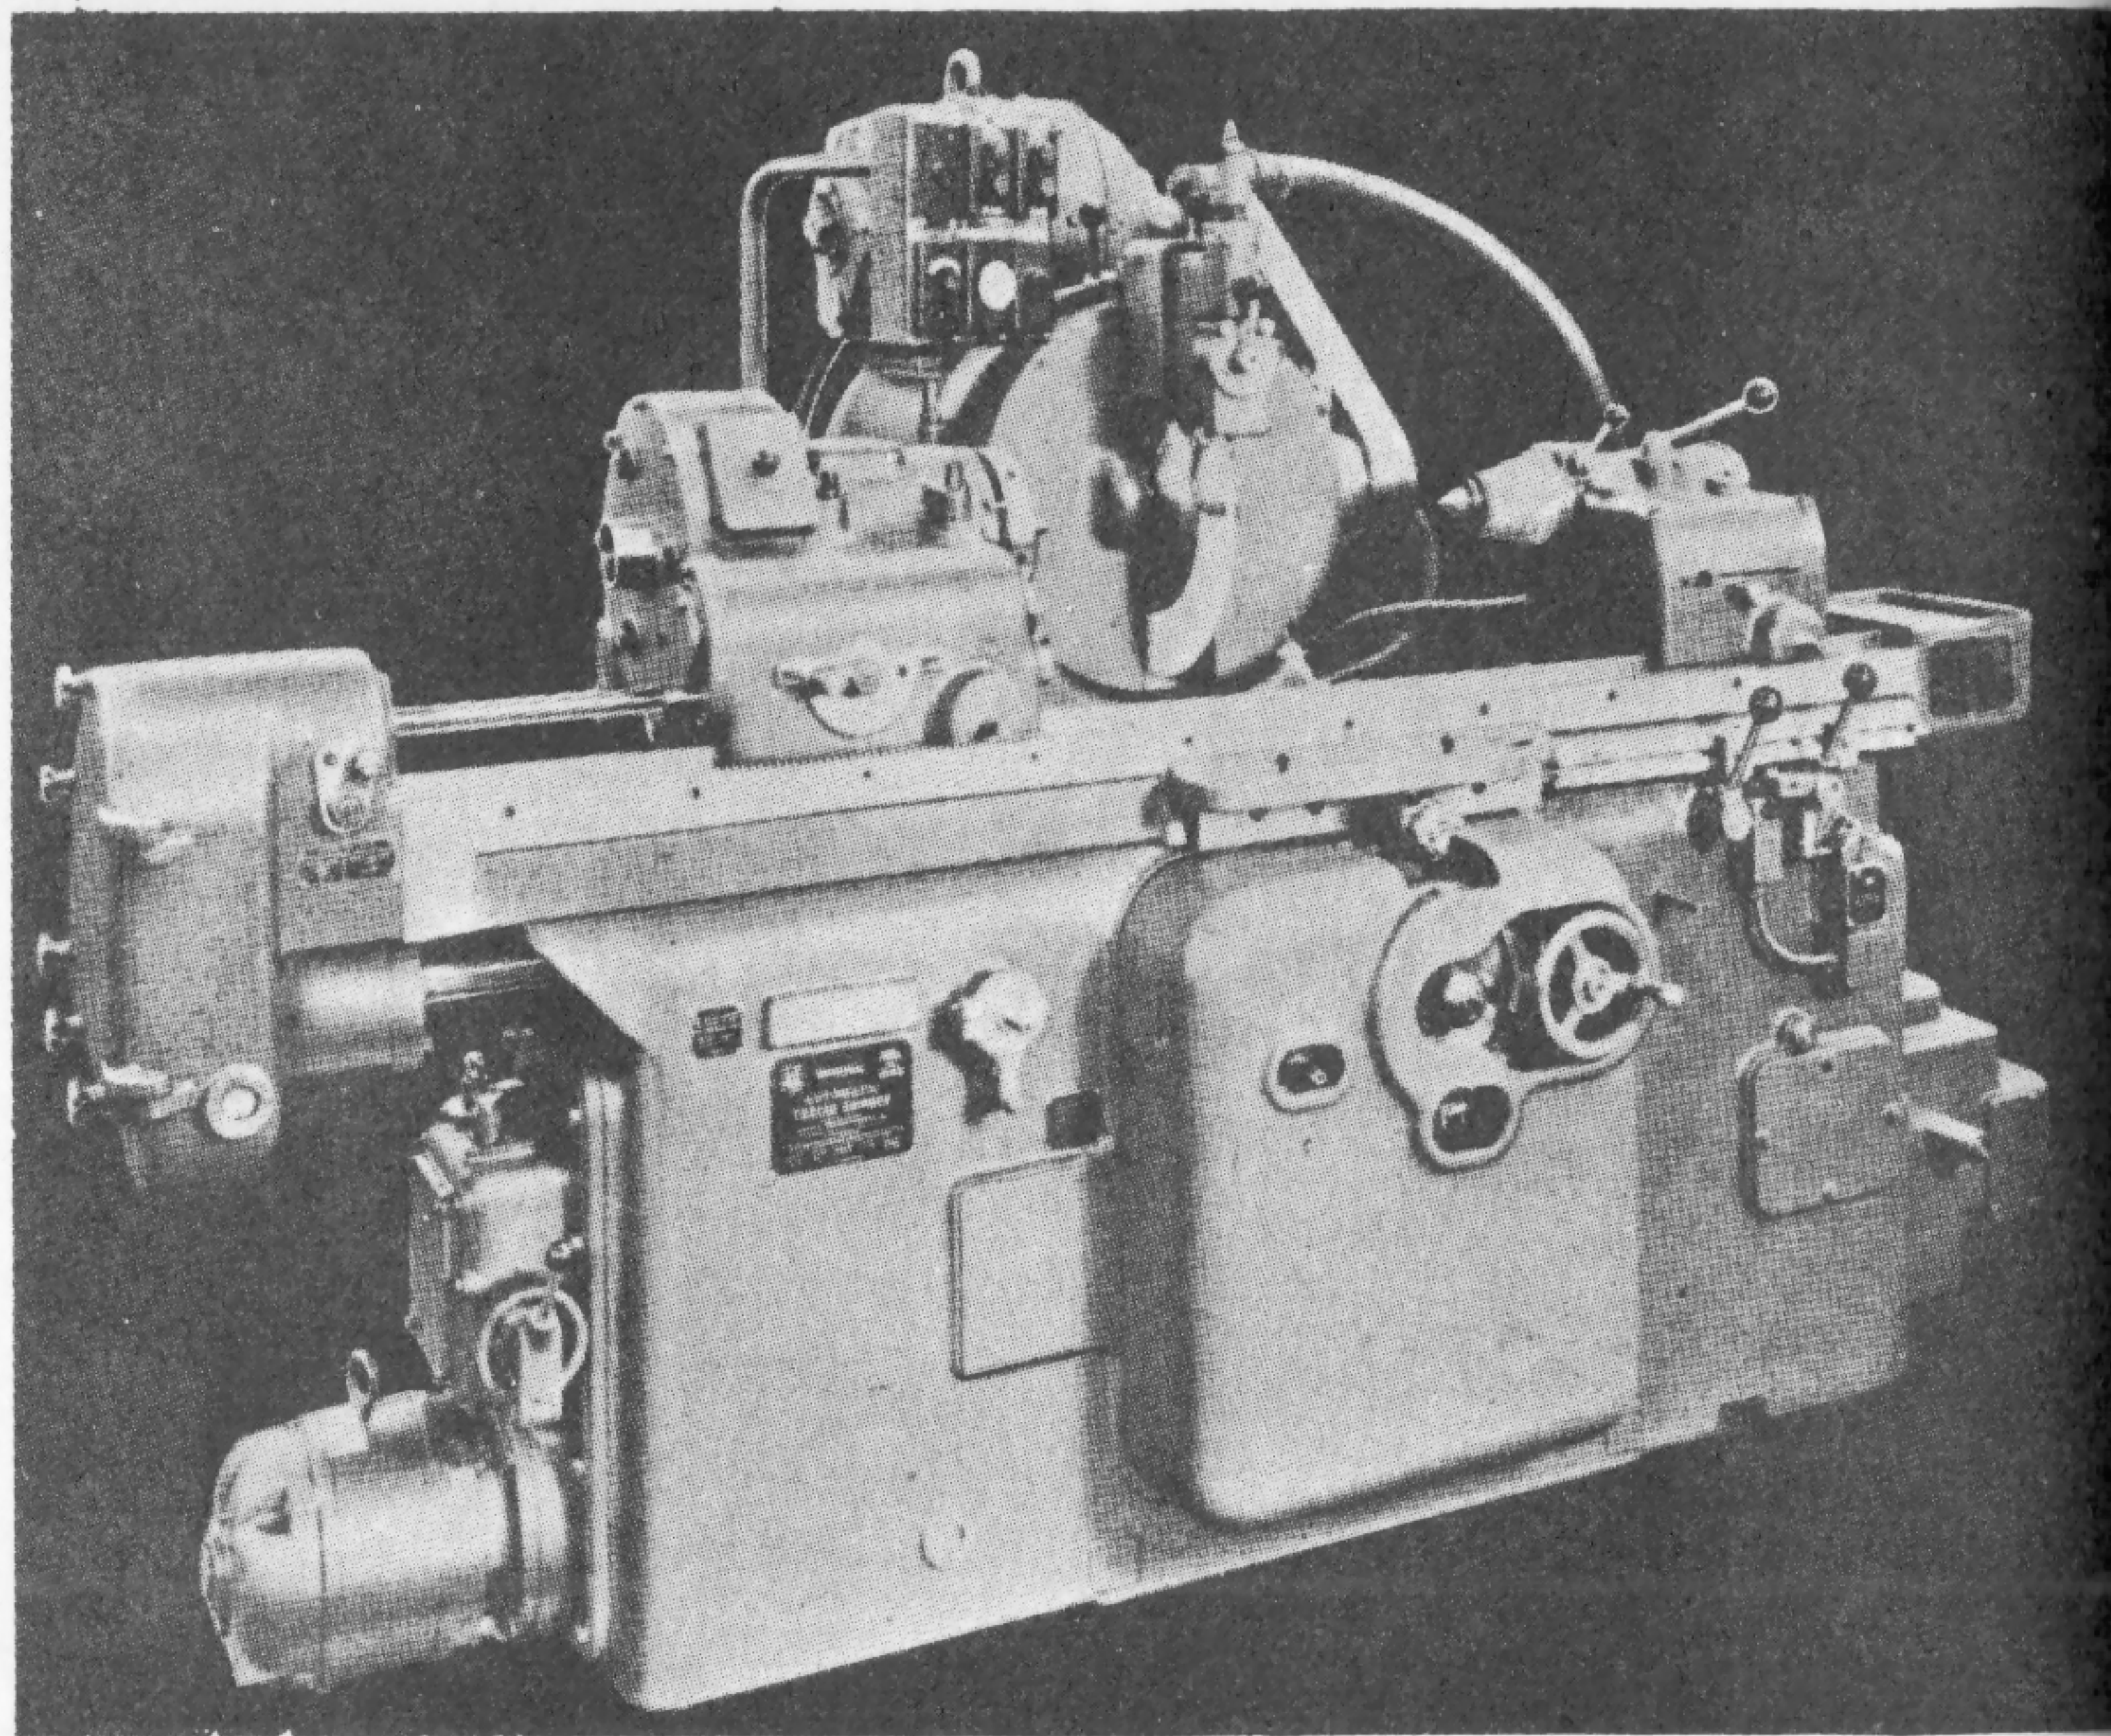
MODERN AUTOMATIC THREAD GRINDER (Lewis)
